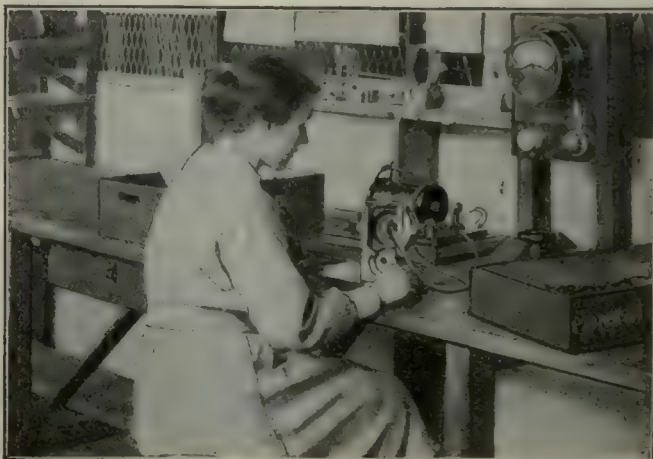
TESTING INSULATION OF MOLDED PARTS
